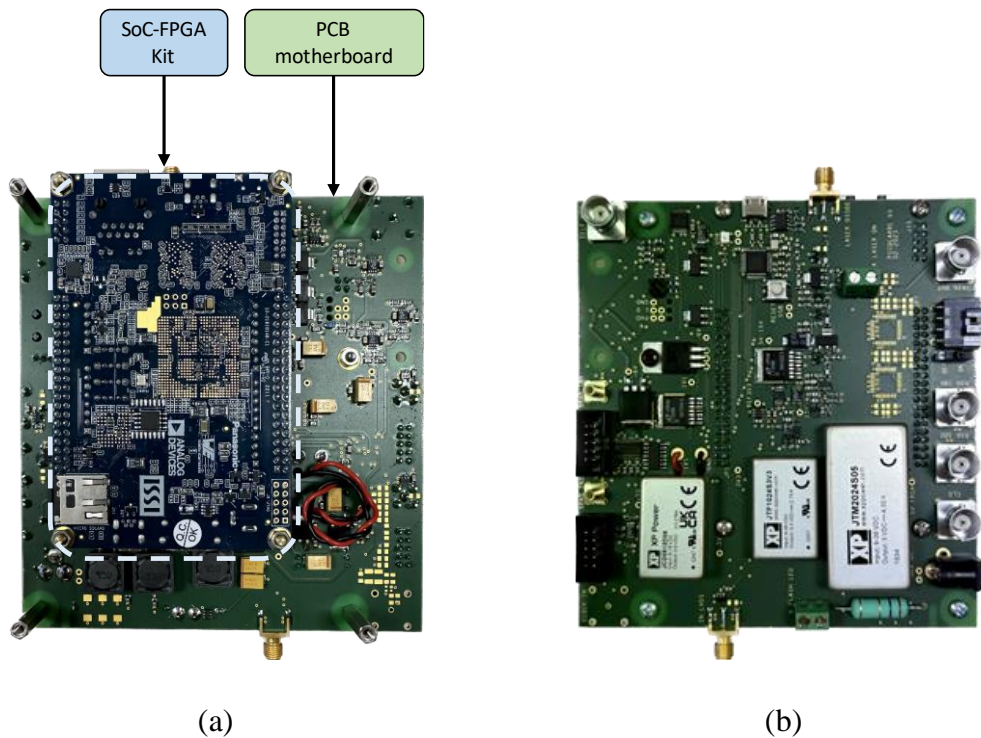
Electronics of the realized TCSPC system with the Cyclone V SoC-FPGA platform and custom PCB motherboard: (a) bottom view, (b) top view.
